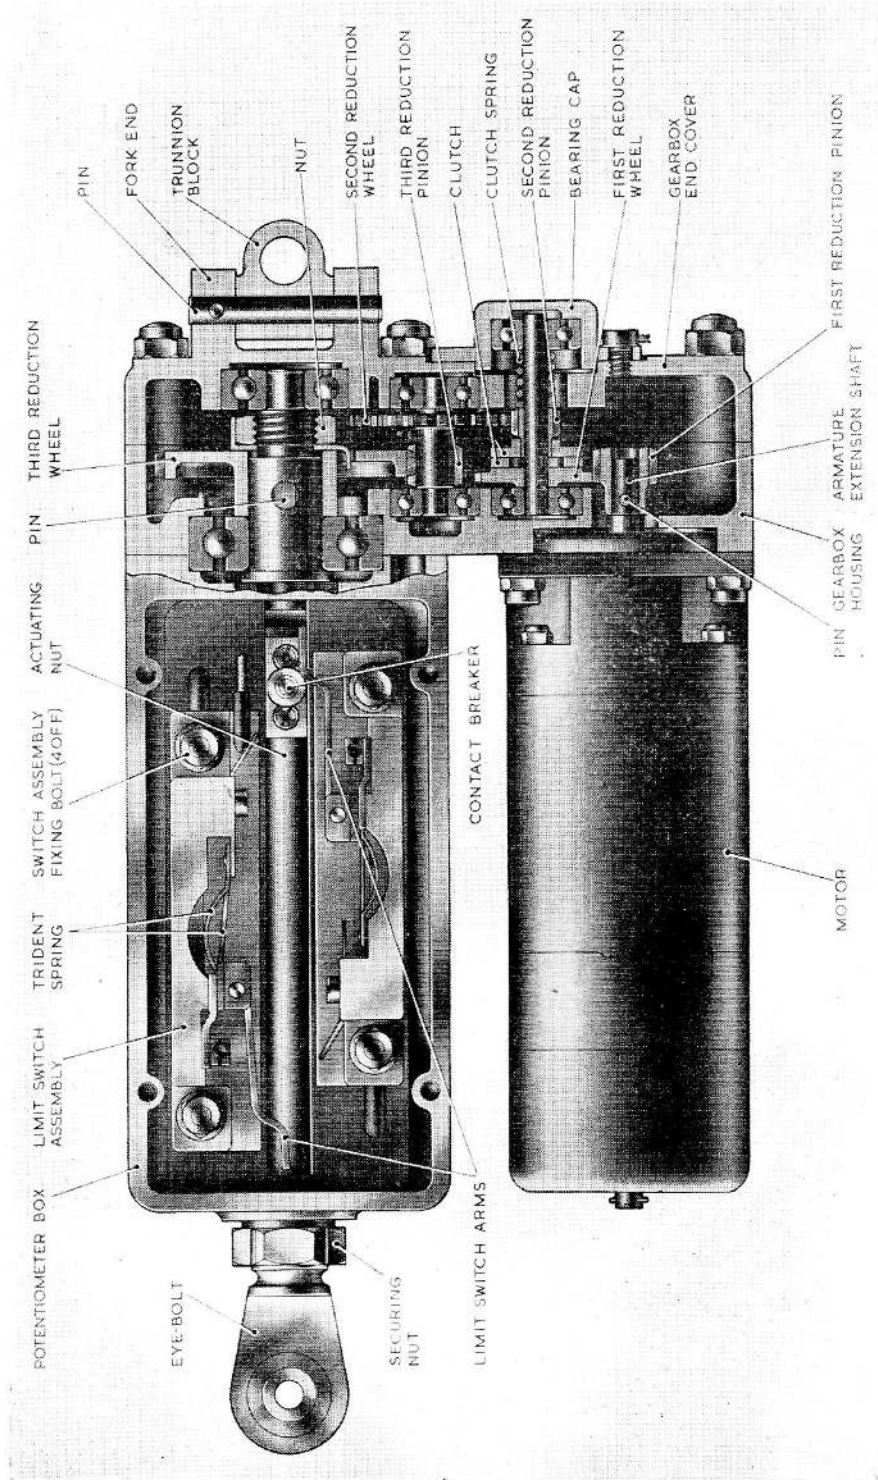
Sectional drawing of gearbox, showing limit switch arrangement
